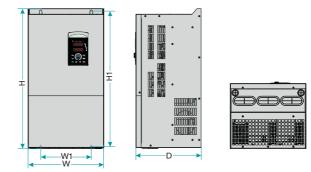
55~110KW AC drive installation dimensions and installation size
